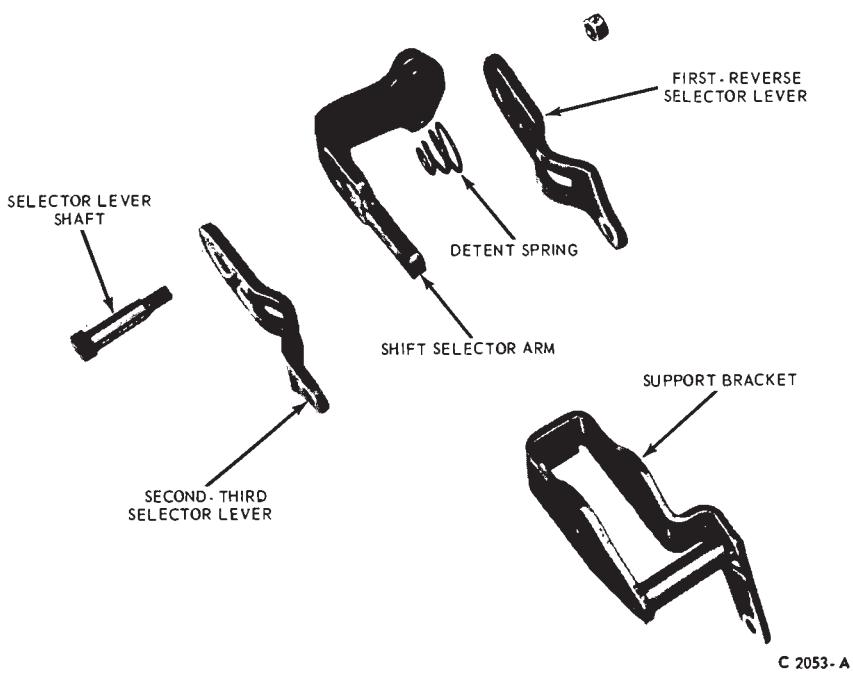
Gear Shift Control Assembly Disassembled—3-Speed
